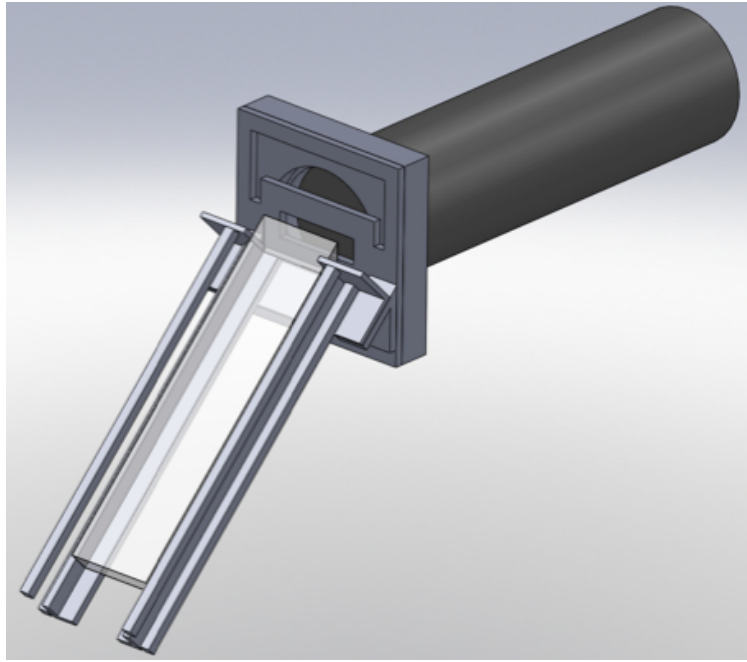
CAD drawing of the MOLLER detector design using an angled quartz.
